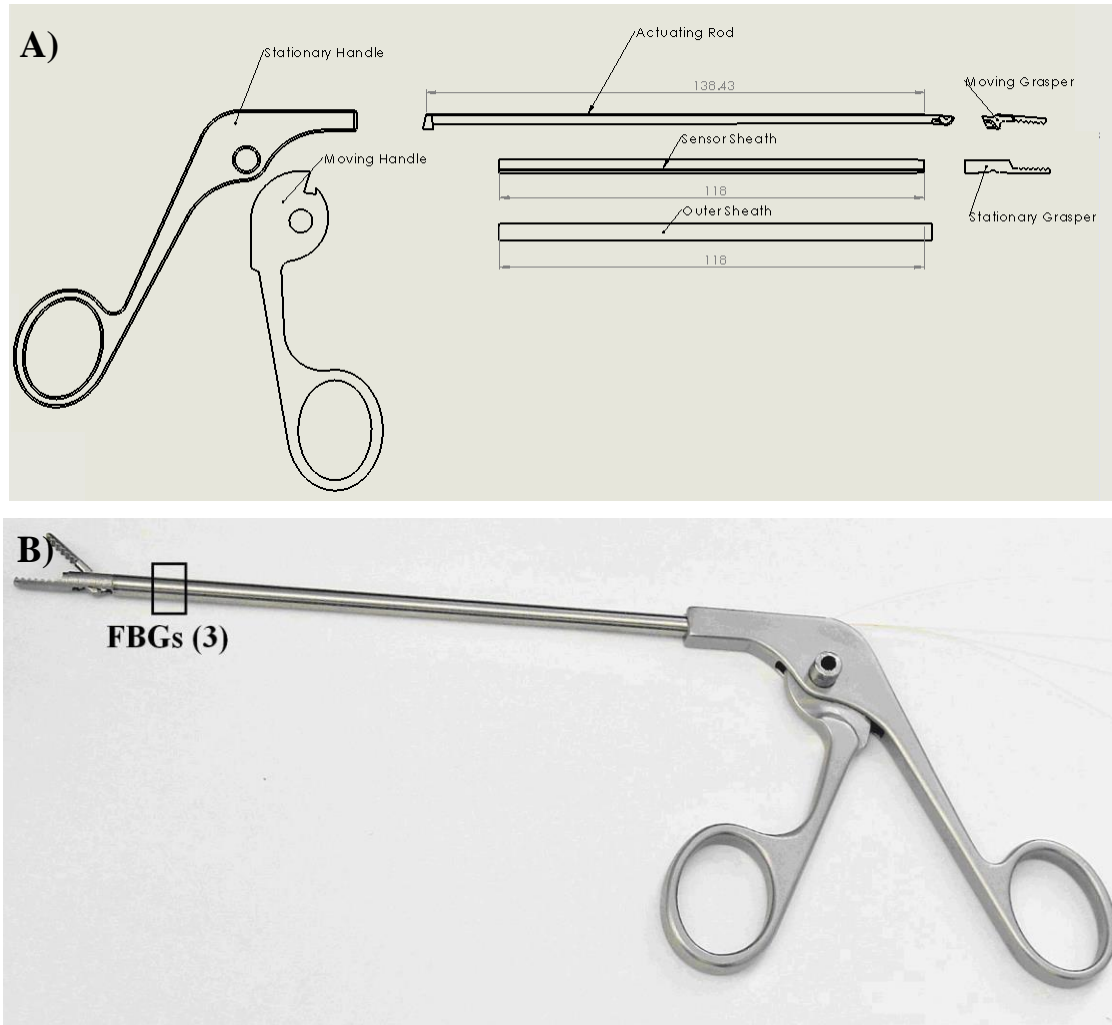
Grasper design (a) exploded view; (b) final manufactured design.
